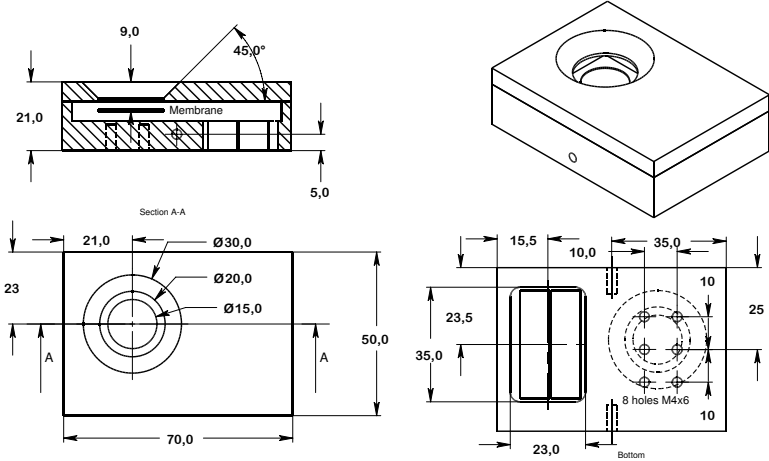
Technical drawing of the package and mounting holes of the 15mm 37-channel MMDM
